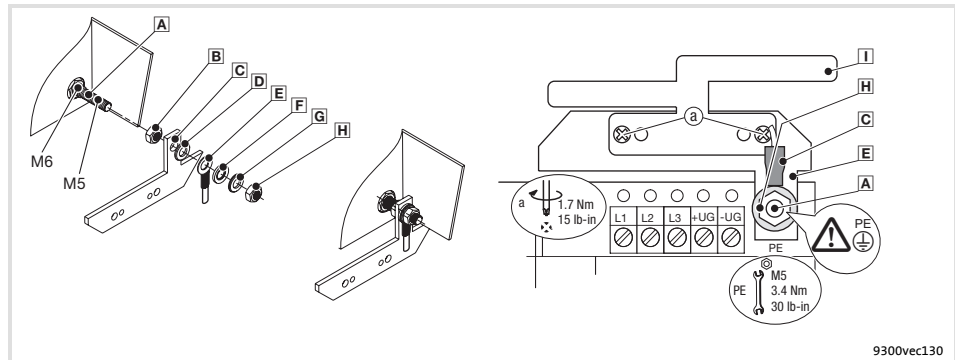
Installation of shield sheet for drive controllers 0.37 ... 11 kW
